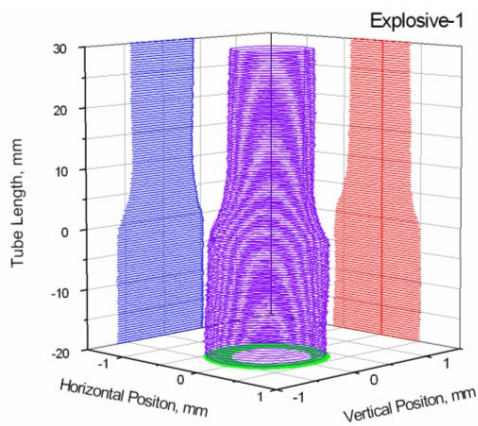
3-Dimensional data of a optimal tube expanded explosively, measured by laser inspection system
